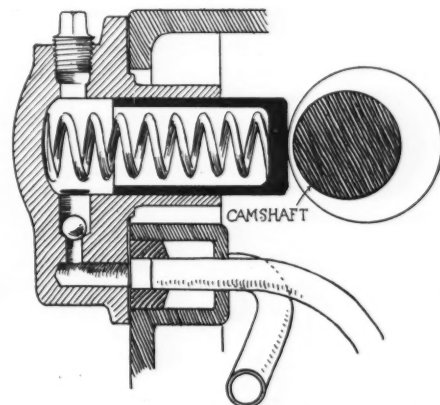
Sectional view of oil pump used on 1916 Velie. The pump is operated by an eccentric on the camshaft
